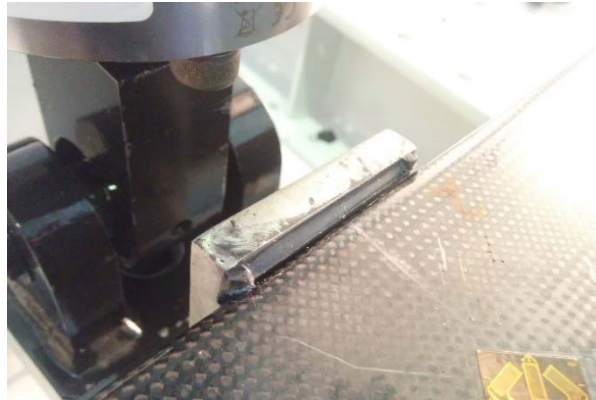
Gap formed between the load bearing an shell caused by adhesive failure
